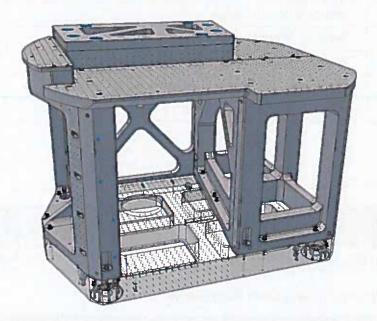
Assembly of the South chassis, sitting on a supporting platform (represented in light grey). The chassis is assembled from three main structural parts (two vertical frames and a connecting "bridge"), and seven additional parts including three large optical tables with tapped holes. The maximum dimensions of the Central chassis (L x W x H) are 2450 x 2050 x 1540 mm, the total weight is about 3 500 kg.
